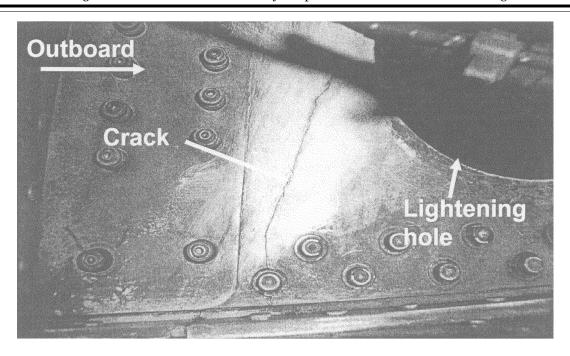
Closeup view of R/H wing rear spar web crack at BL 114 area looking forward (The inboard flap is removed in this figure, but removal of the flap is not required to do the inspection).
